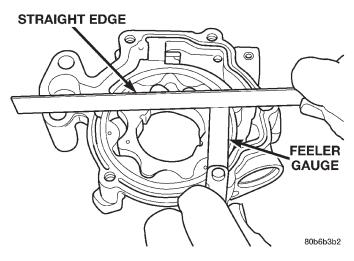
Measuring Clearance Over Rotors CYLINDER BLOCK
